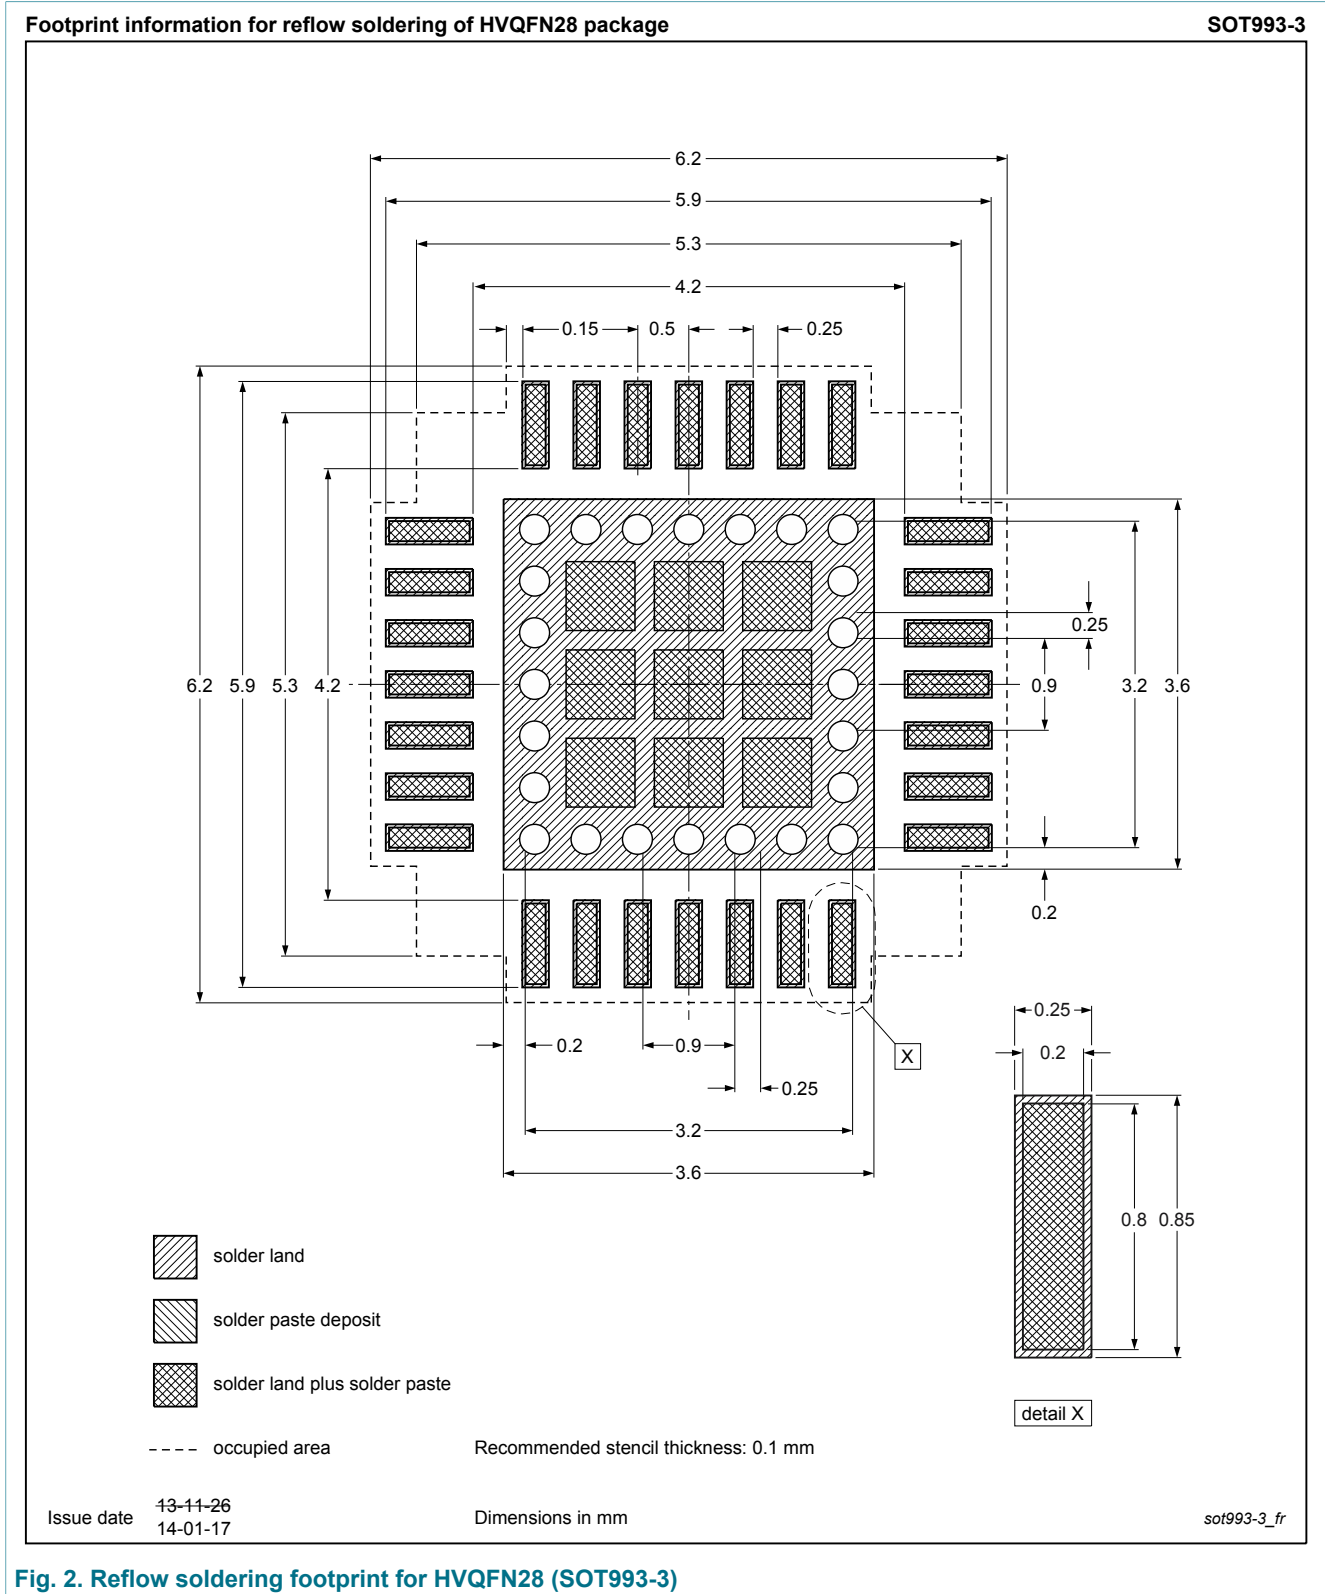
Reflow soldering footprint for HVQFN28 (SOT993-3)
